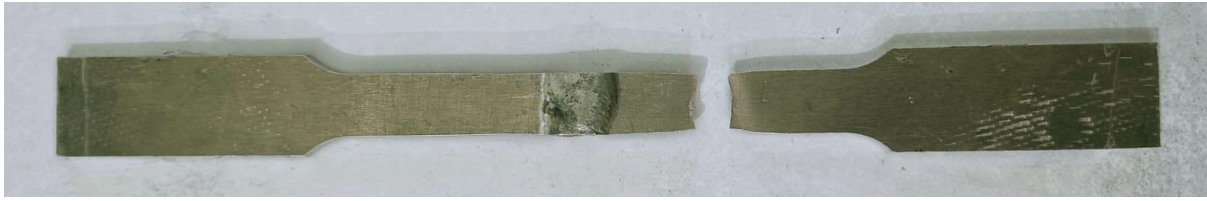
Fractured weld specimen E6 of ER4047
